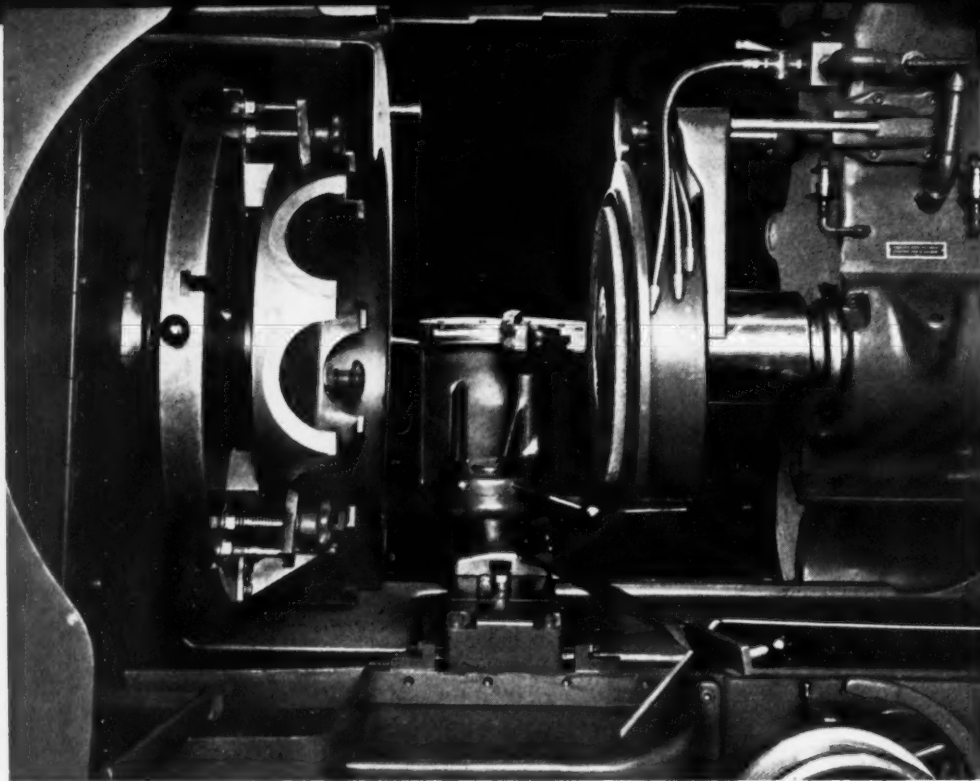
Typical Bryant Chucking Grinder Set-up with Special Wheel Dresser, Used in Finish-grinding Operations on Inner Surfaces of Wright Aircraft Engine Crankcases
